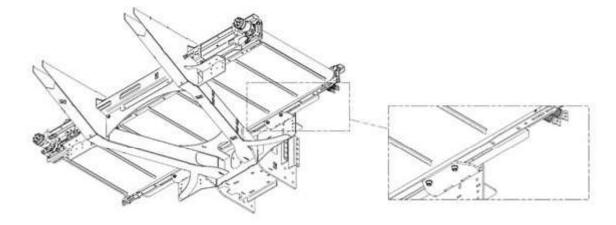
Adjusting the Offset of the Fixed Horizontal Conveyor
